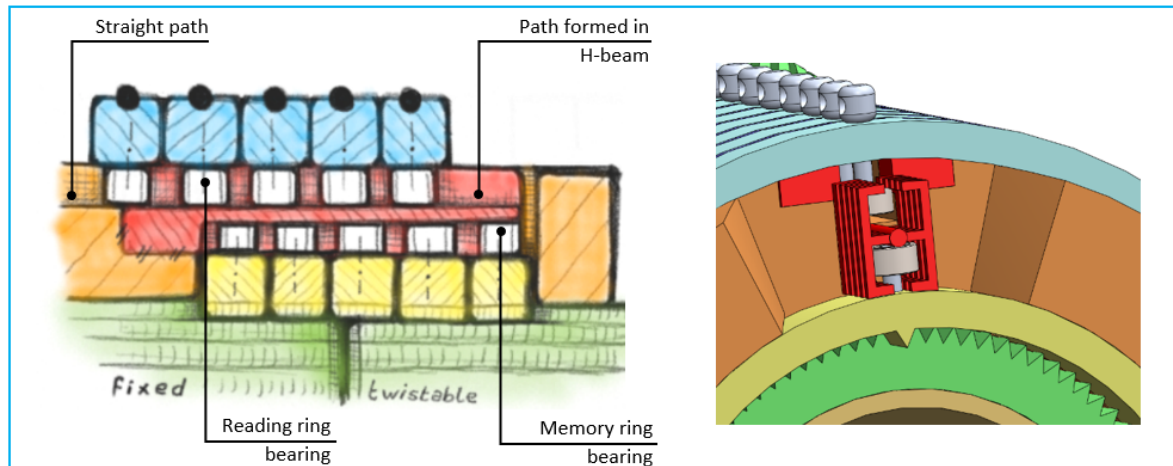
H-beam containing the bearings of the memory rings and the reading rings. The H-beam forms the path made by the memory rings and transmits this path to the reading rings.
